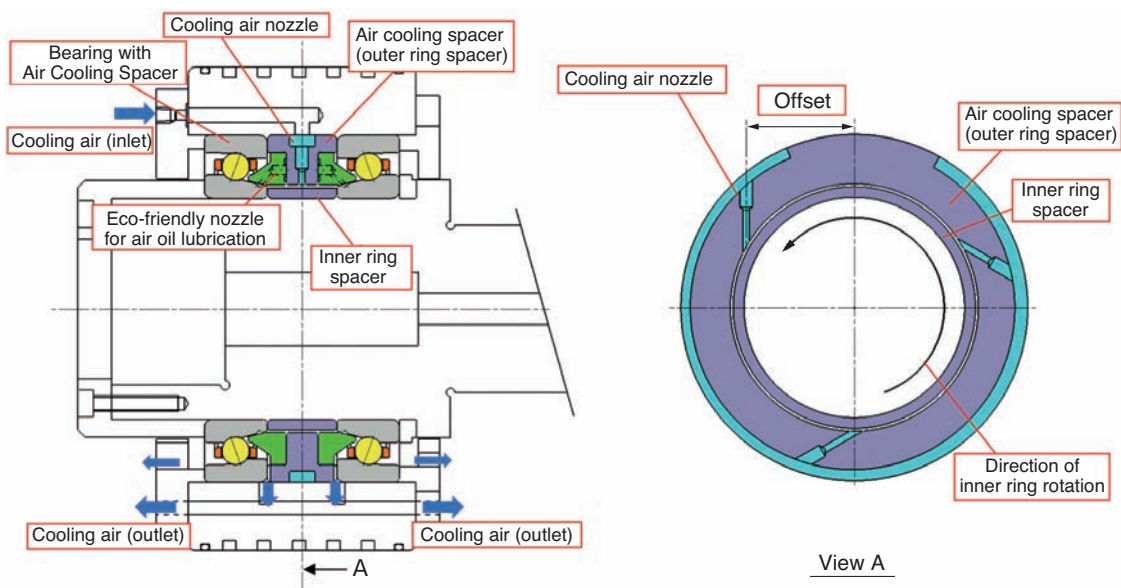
Machine tool main spindle bearings with air cooling spacer (for air oil lubrication)¹⁾
